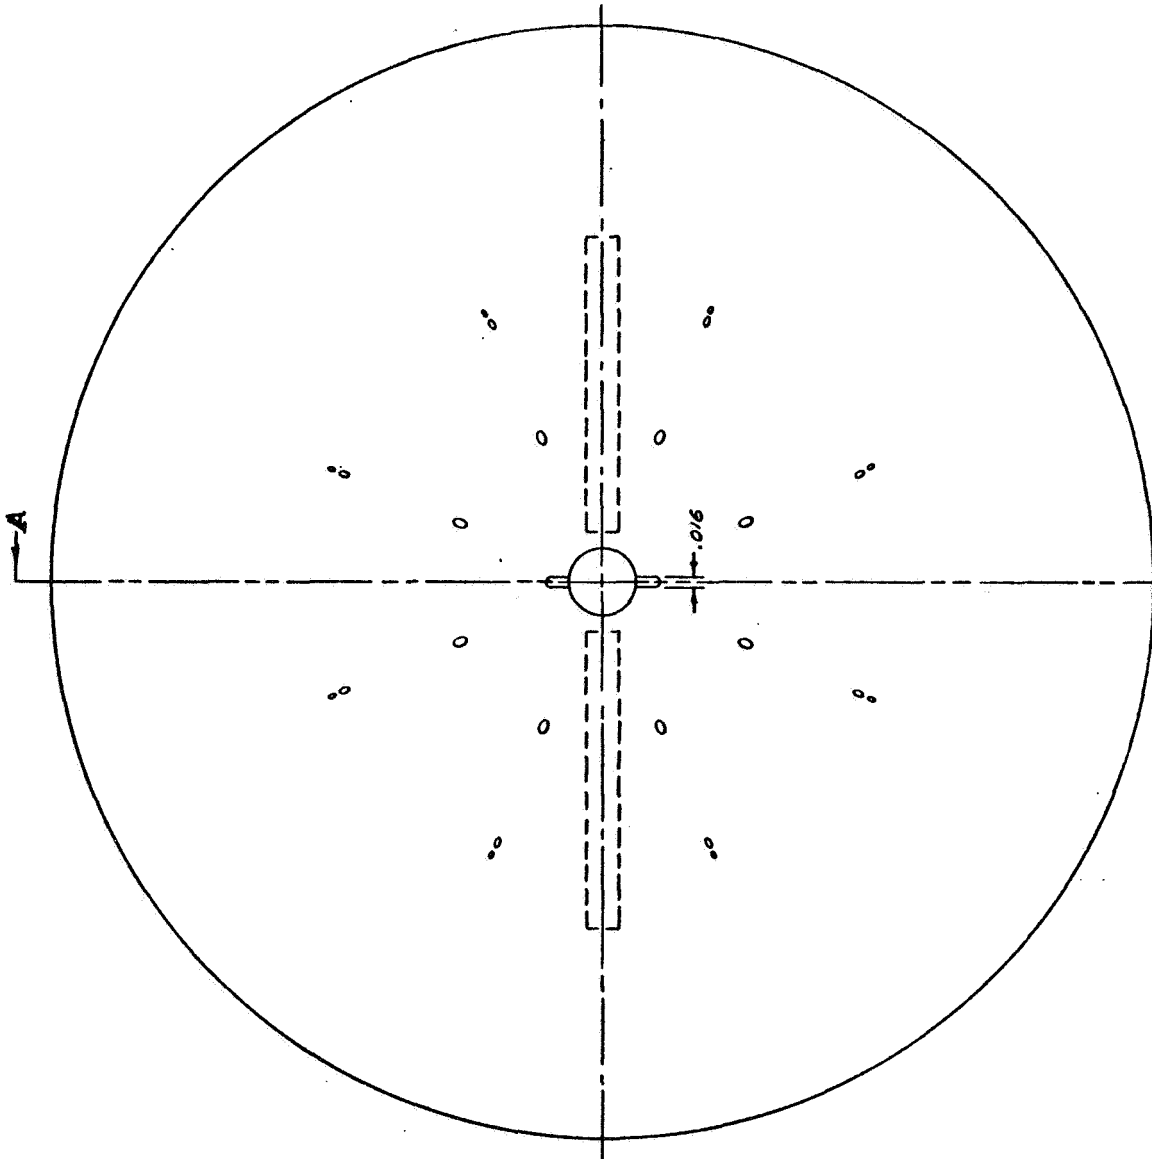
C. WORKING DRAWING FOR 100-POUND THRUST INJECTOR WITH IMPINGING JETS IN PRE-COMBUSTION CUP, DESIGN I
